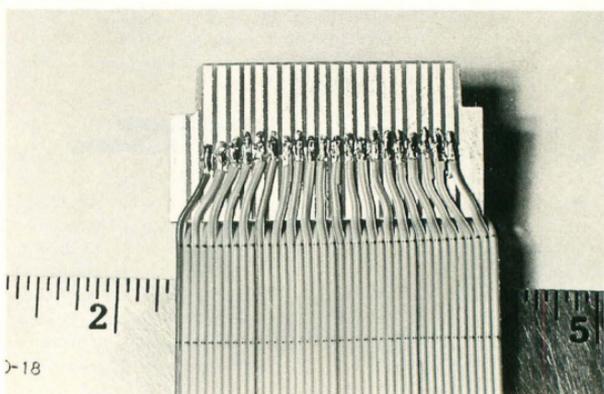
Photograph of Ribbon Adapter Assembly.
